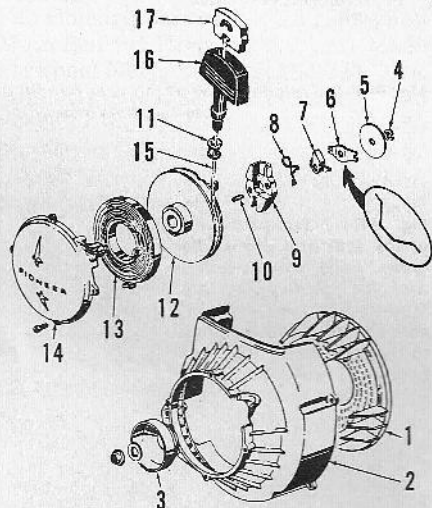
Exploded view of rewind starter. Friction spring (6) should be installed as shown.
